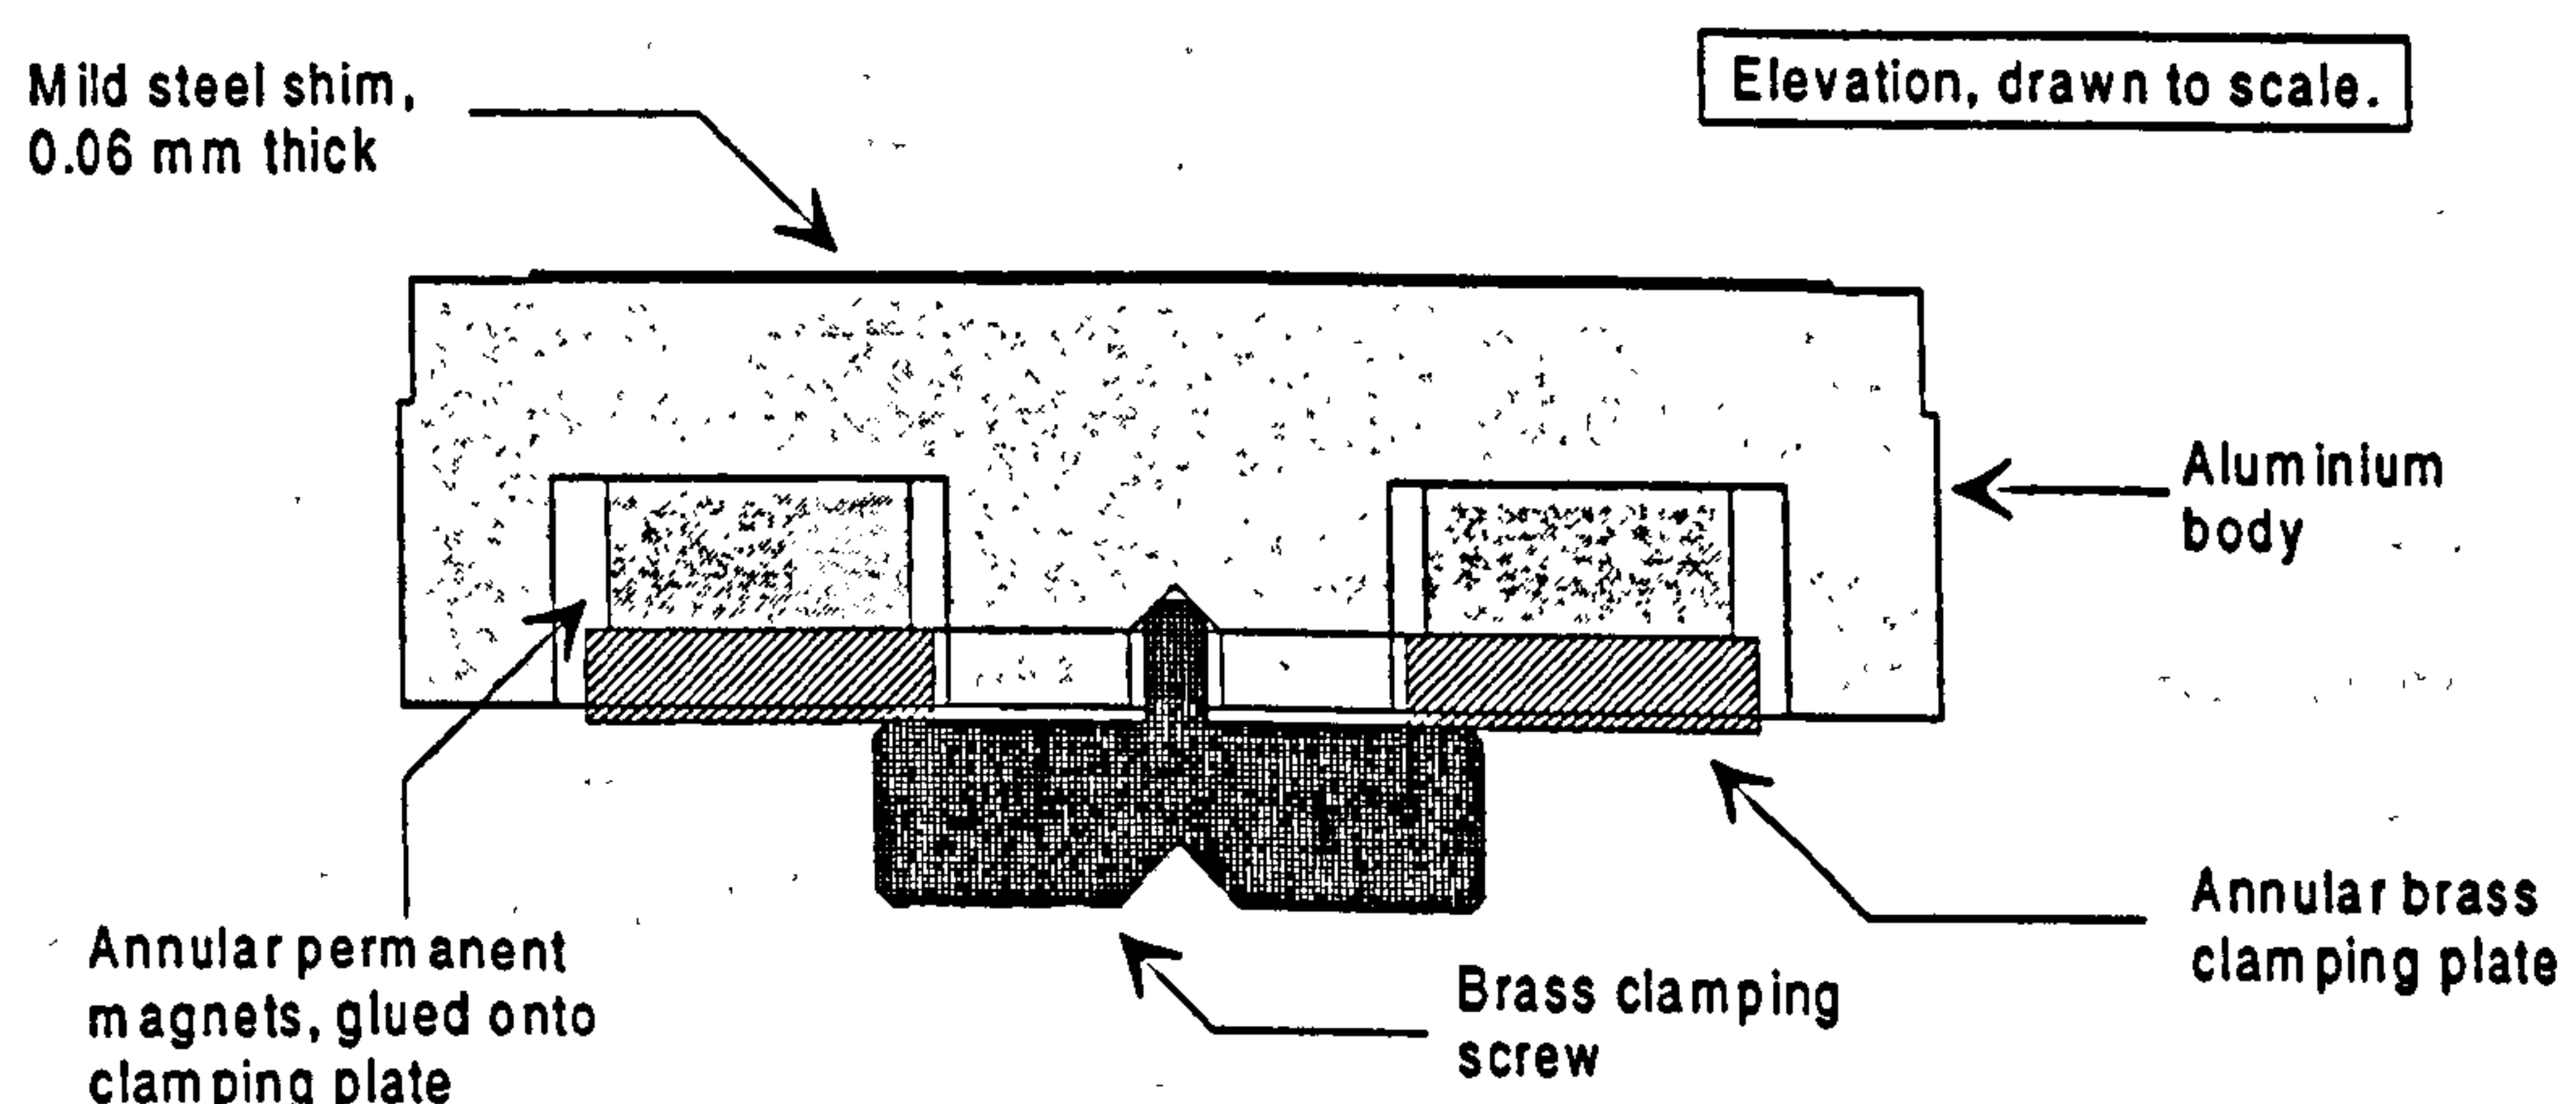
Cross section of the lower end cap and shim clamping device. To weigh the shim, the clamping screw is removed, thus releasing the clamping plate and magnets, and the shim is thus freely removed. The whole assembly is clamped into the tube by a strap that hooks onto lugs brazed onto the tube, and a screw that locates in the recess in the brass clamping screw.
